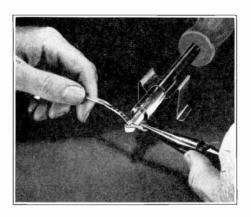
Method of tinning a lug prior to mounting it on a chassis. This technique is used only for untinned lugs, or for tinned lugs which have become coated with oxides and dirt.
